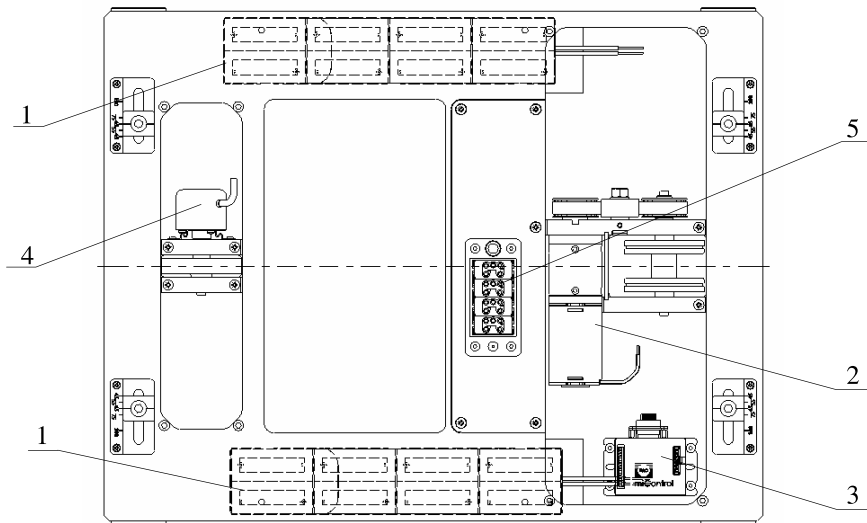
A view of the platform with power system elements: 1 – battery pack, 2 – geared motor, 3 – control, 4 – encoder, and 5 – docking connector
